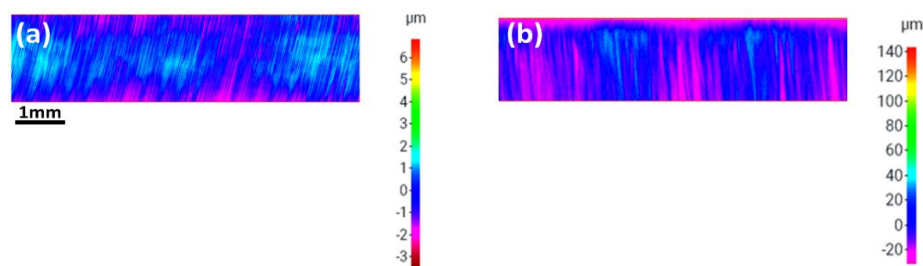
Surface roughness and pattern of milled edge (a) and laser cut edge (b).
